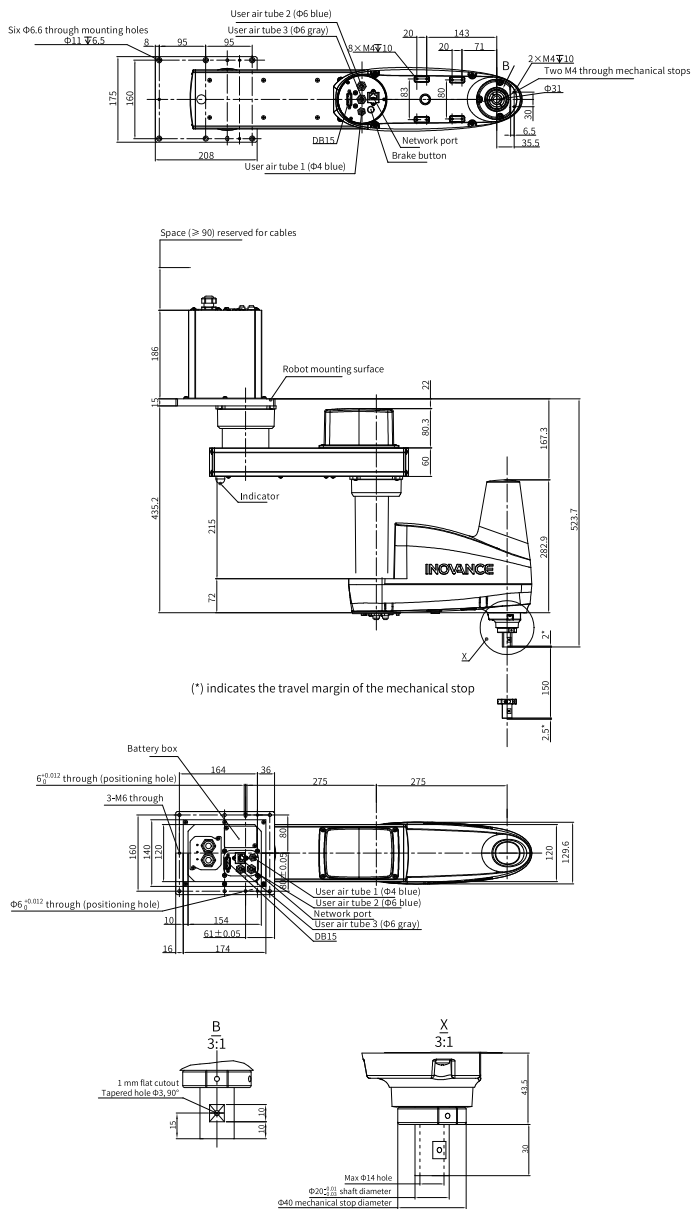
Outline dimensions for IR-TS5-55Z15S-INT (unit: mm)
